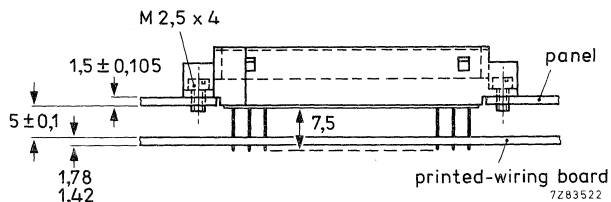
Mounting example of a male part with dip-solder pins (7,5 mm).
